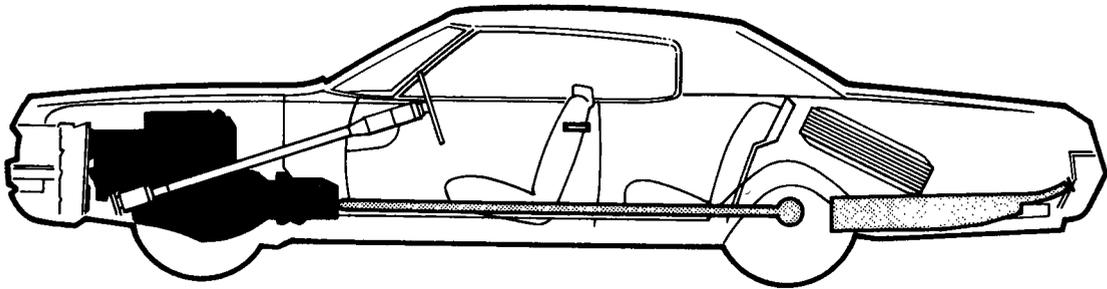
Drivetrain Arrangement for Engine-Mounted Flywheel/
